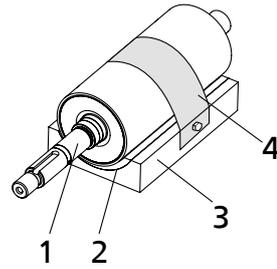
Auxiliary device for installing/removing the motor-end bearing sleeve
